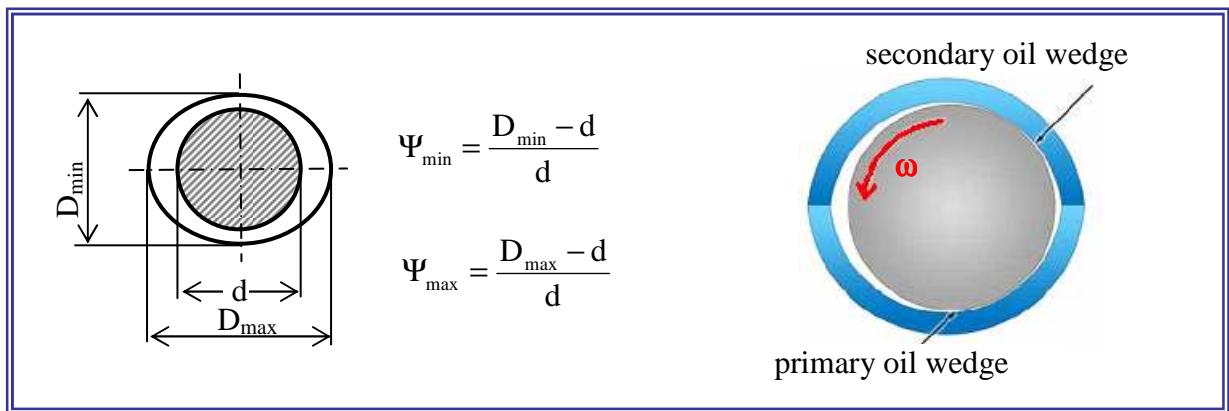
Elliptical Bearing - Design, Constitution of Oil Wedge
